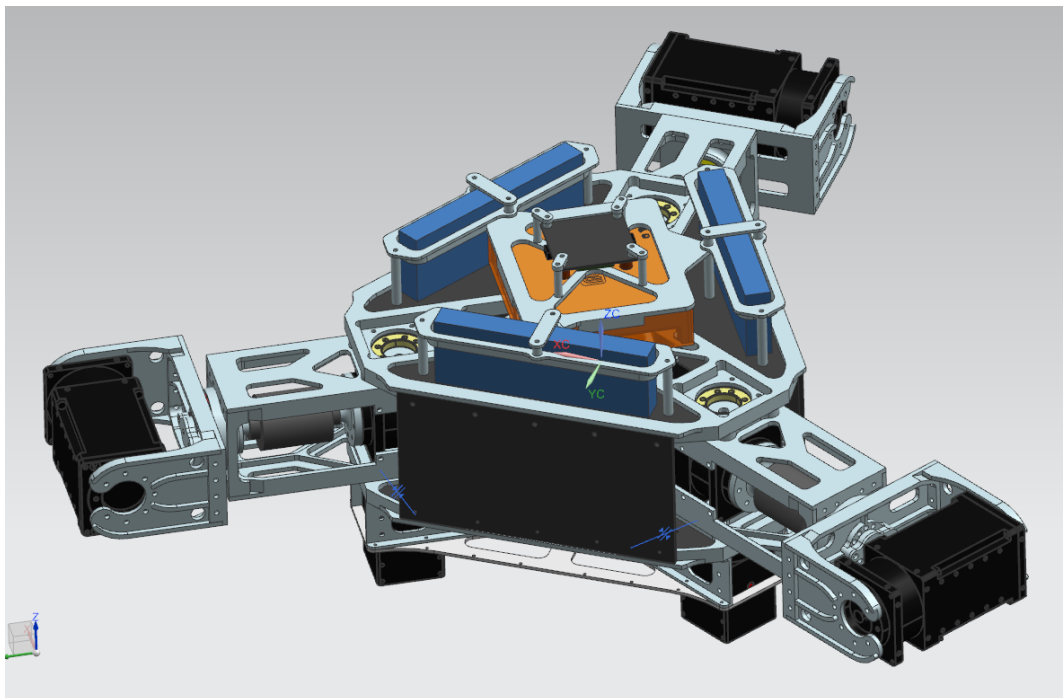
CAD View of Top Side of Body and Hip Assembly
